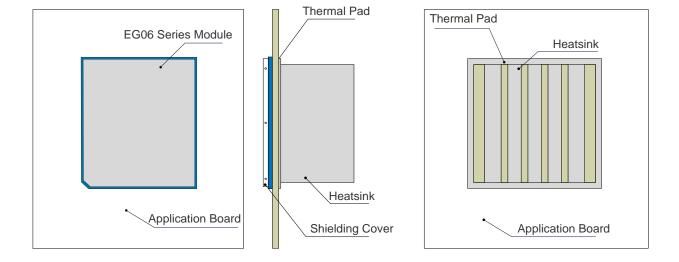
Reference Design of Heatsink (Heatsink at the Backside of PCB)
